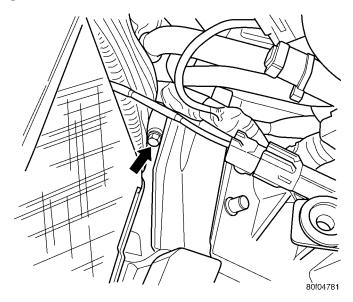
UPPER STARTER BOLT - 2.4L TURBO
